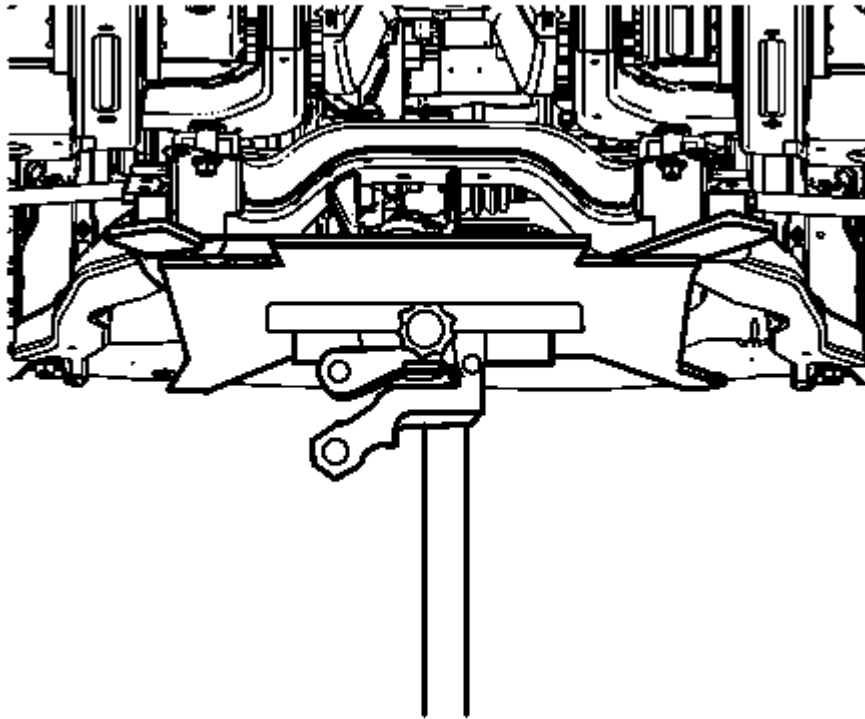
Installing En-49802 Cradle Supporter To Hydraulic Jack Stand
